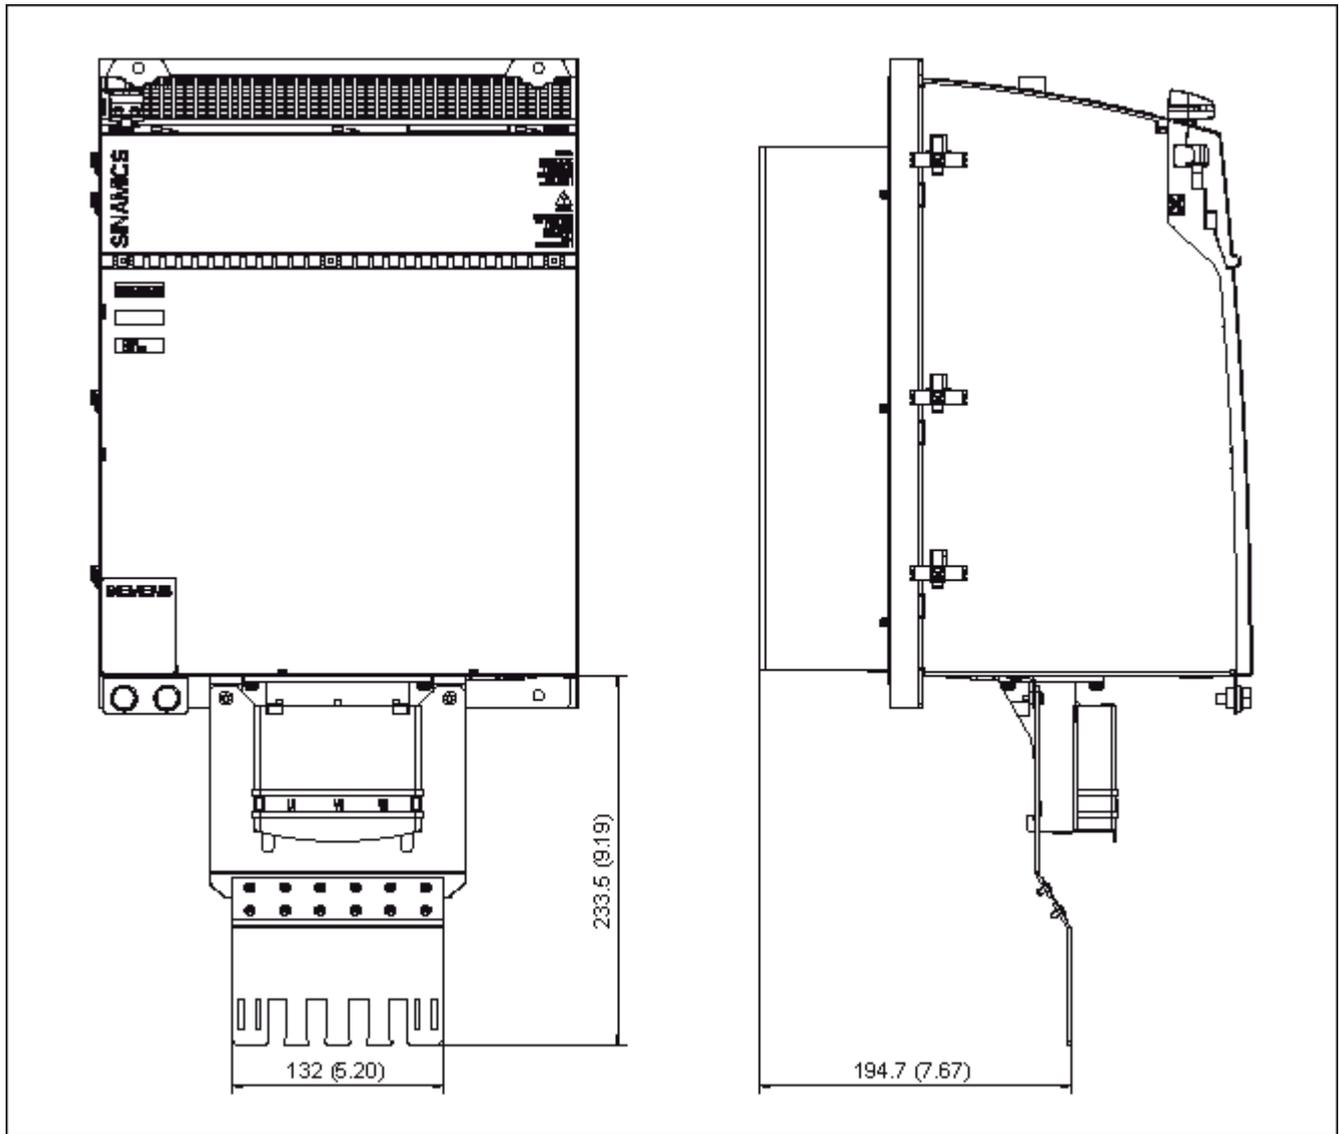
Dimension drawing of shield connecting plate on a 300 mm component with external air cooling, all dimensions in mm and (inches)
